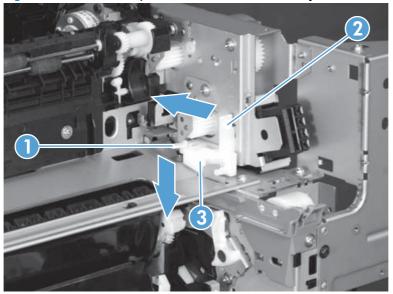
Install a replacement fuser drive assembly (2 of 3)
